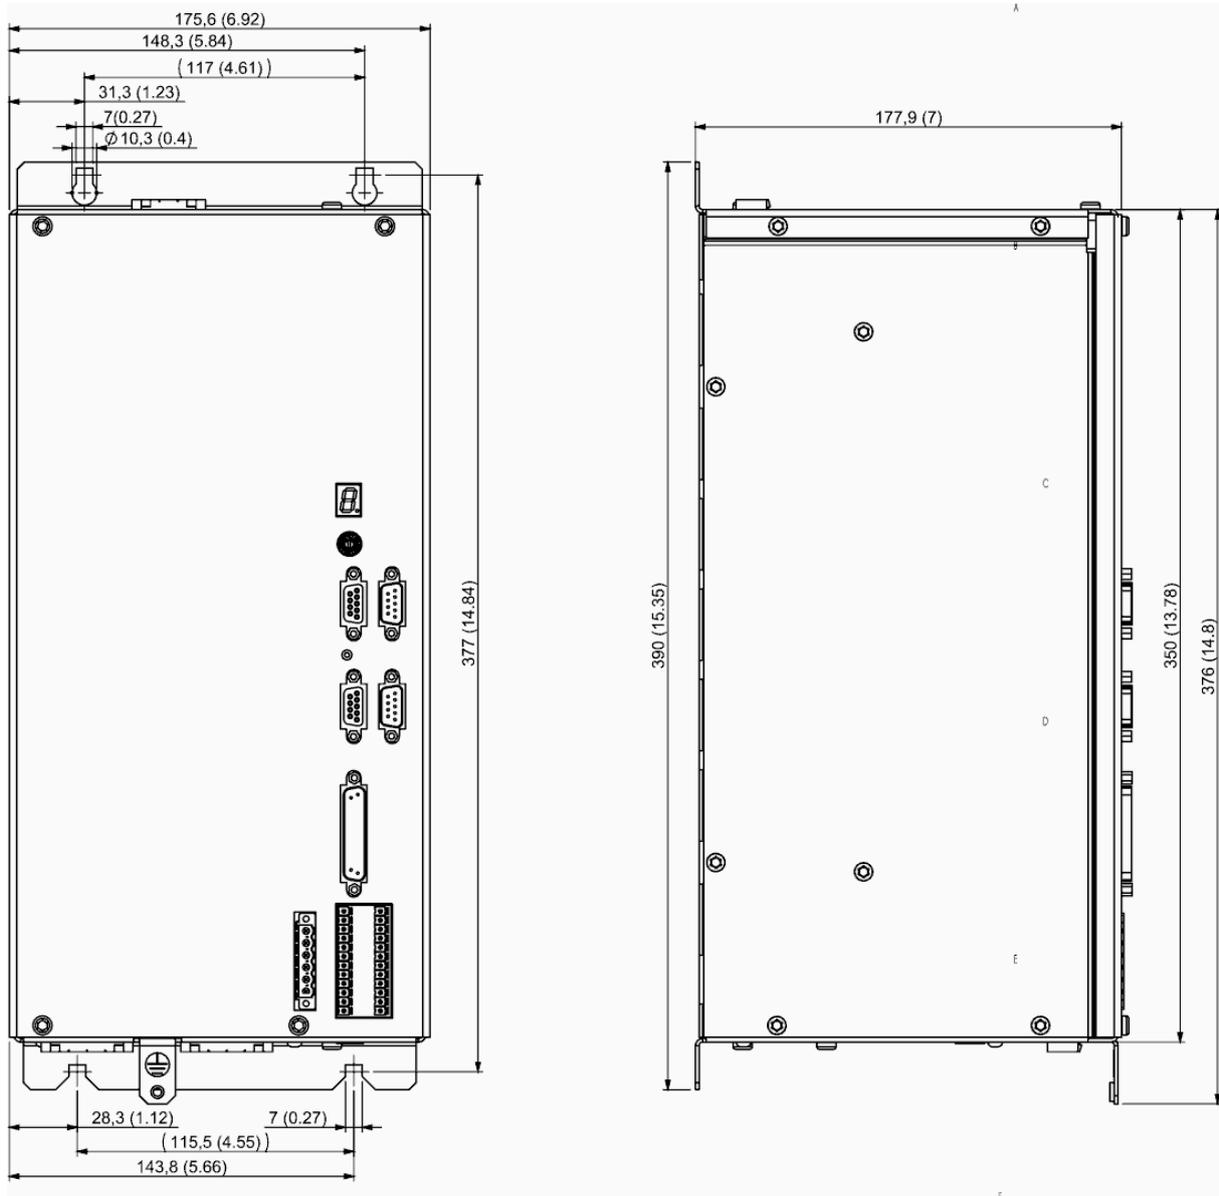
Dimensions of 0362145xx (device version < 4.200) in mm (inch)
